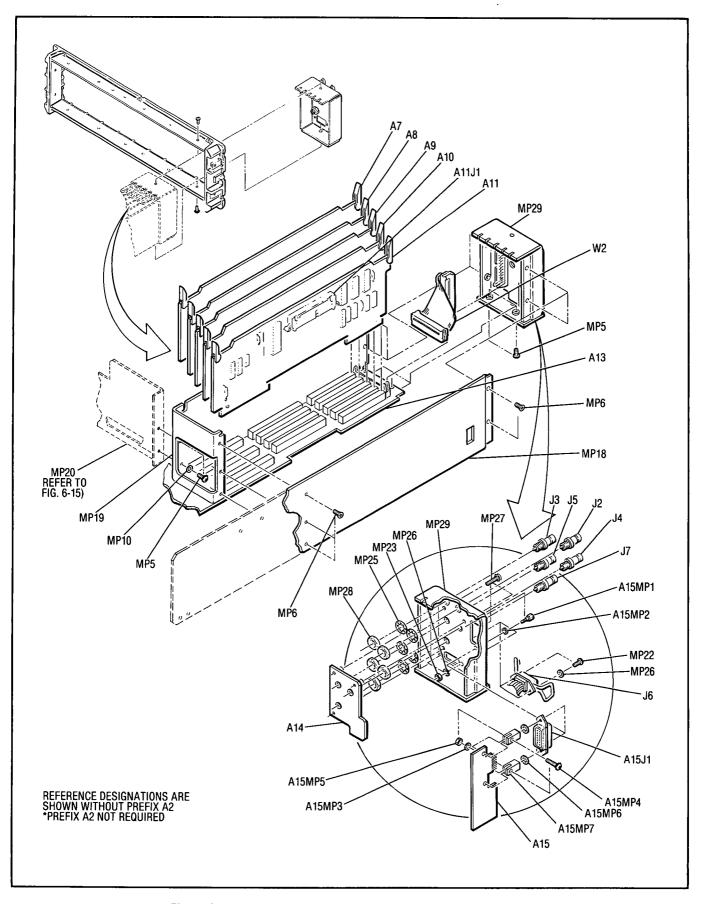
P/O A2 Controller and Rear Panel Parts Identification
